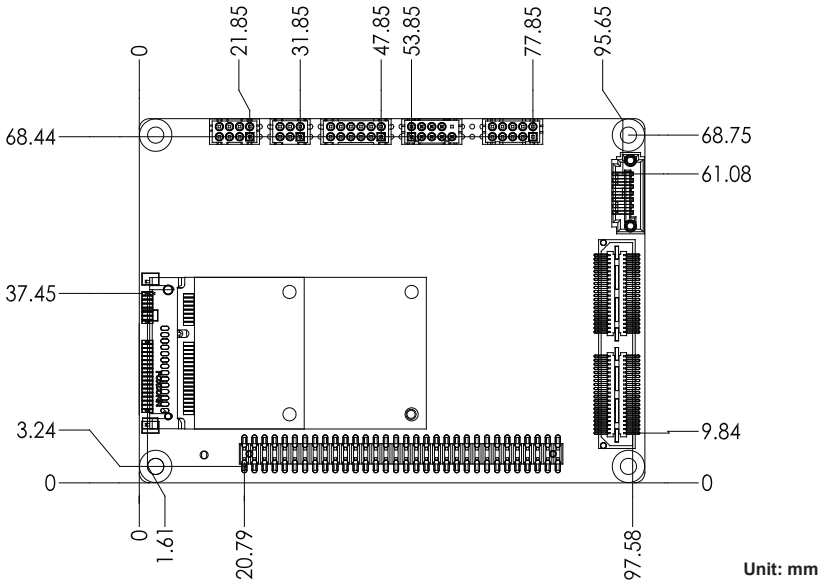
MIO-3260C Mechanical Drawing (Bottom View)
